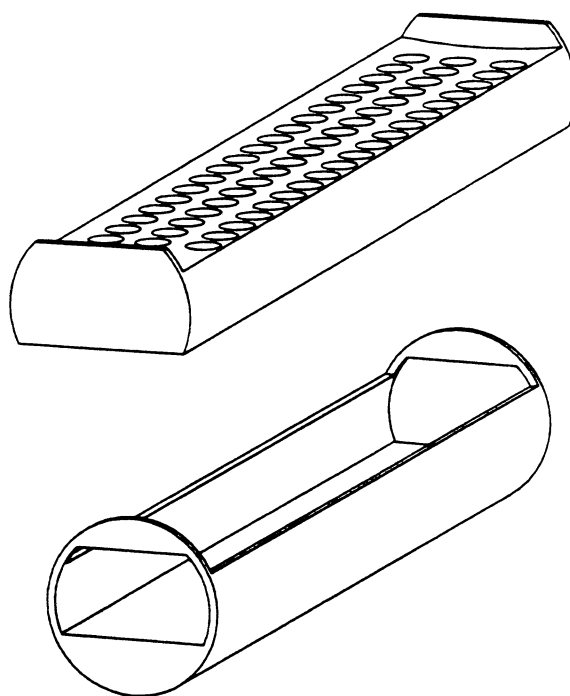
Storage Drawer (top) and Sleeve (bottom)
